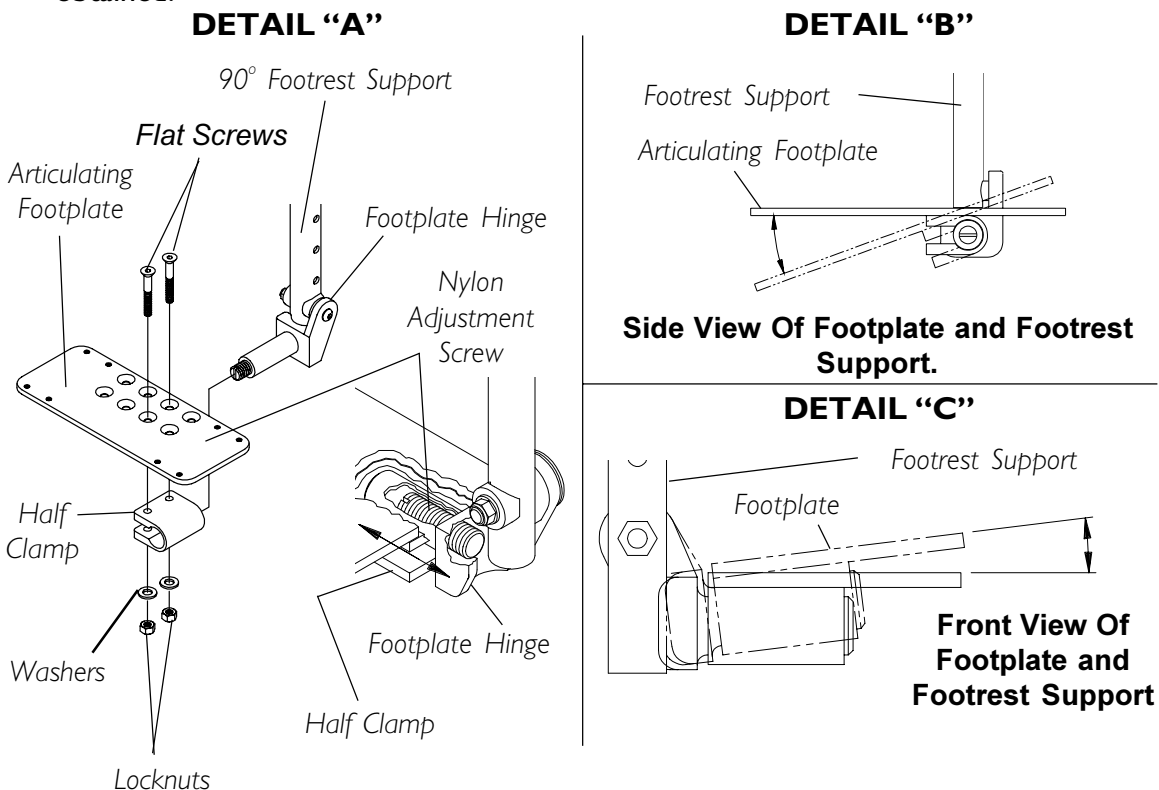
ADJUSTABLE ANGLE FLIP-UP FOOTPLATES
